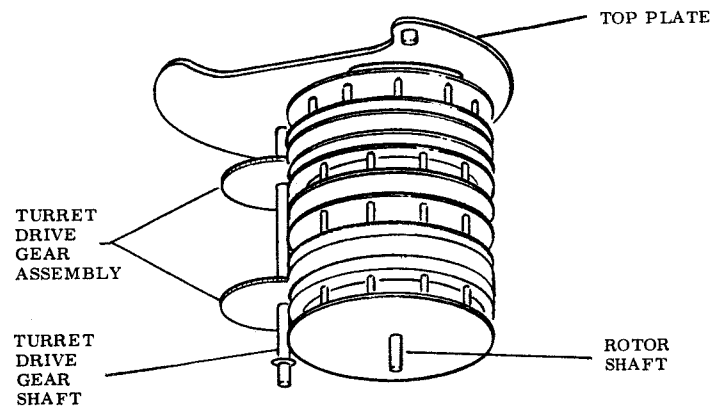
RF Amplifier Assembly A2A4, RF Chassis and Turret Assembly Parts Disassembly Location
